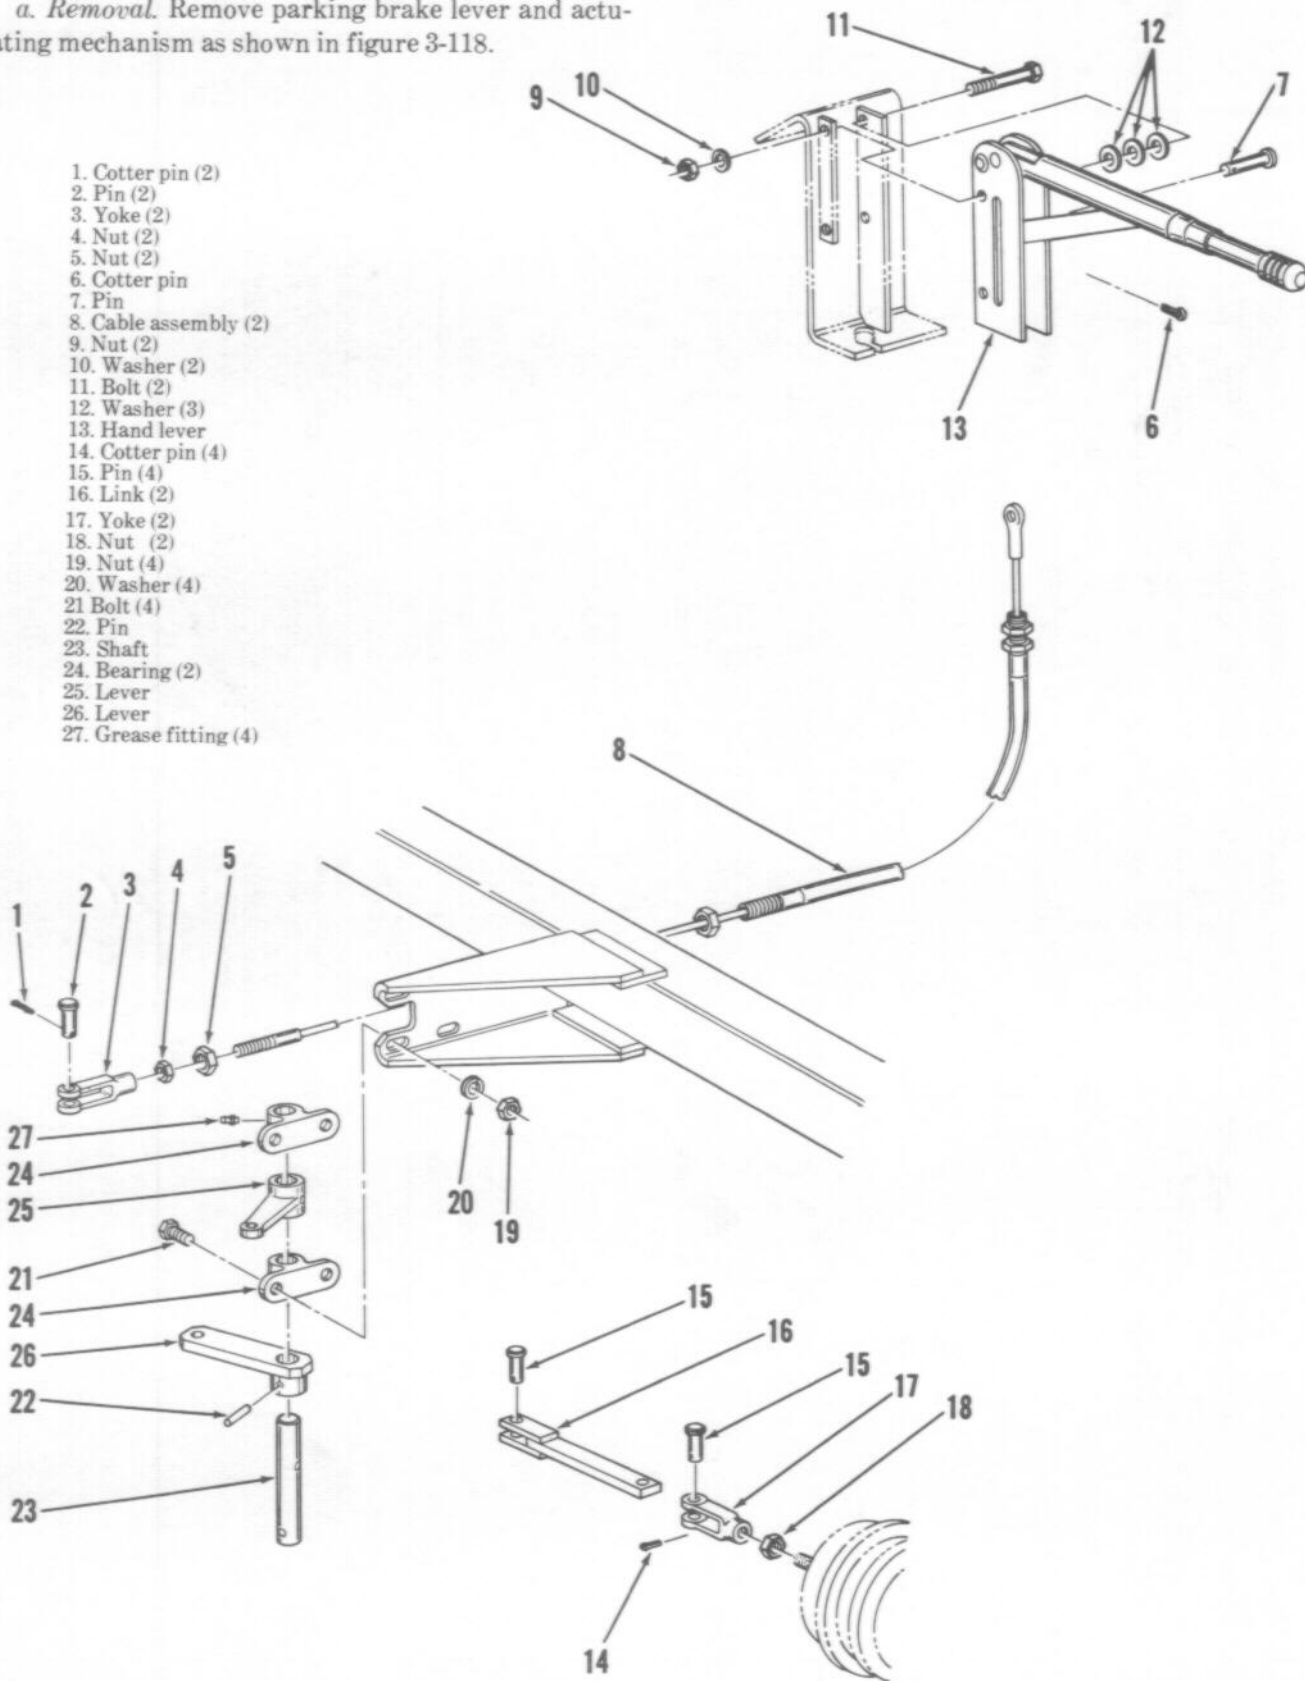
Parking brake lever and actuating mechanism; removal and installation.
